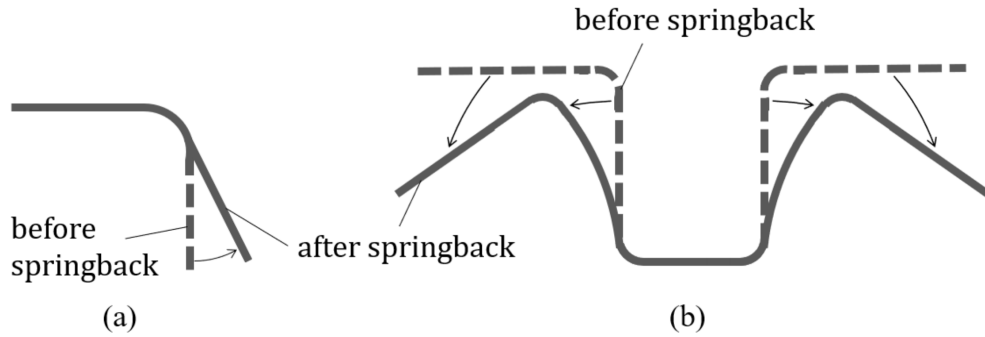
Illustrations of Springback in Sheet Metal Forming: (a) Bending Operation, (b) U-Draw/Bending [2].
